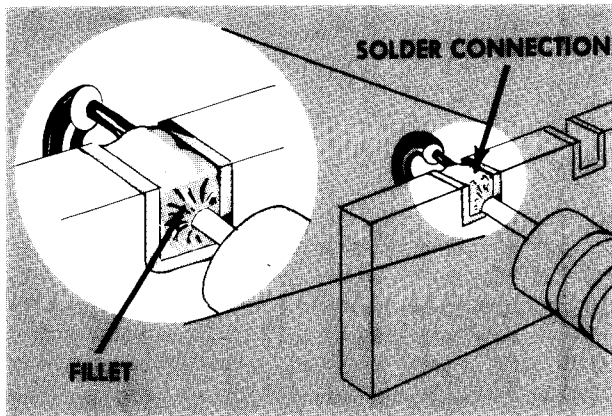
Note the slight fillet formed on a correctly soldered joint.
